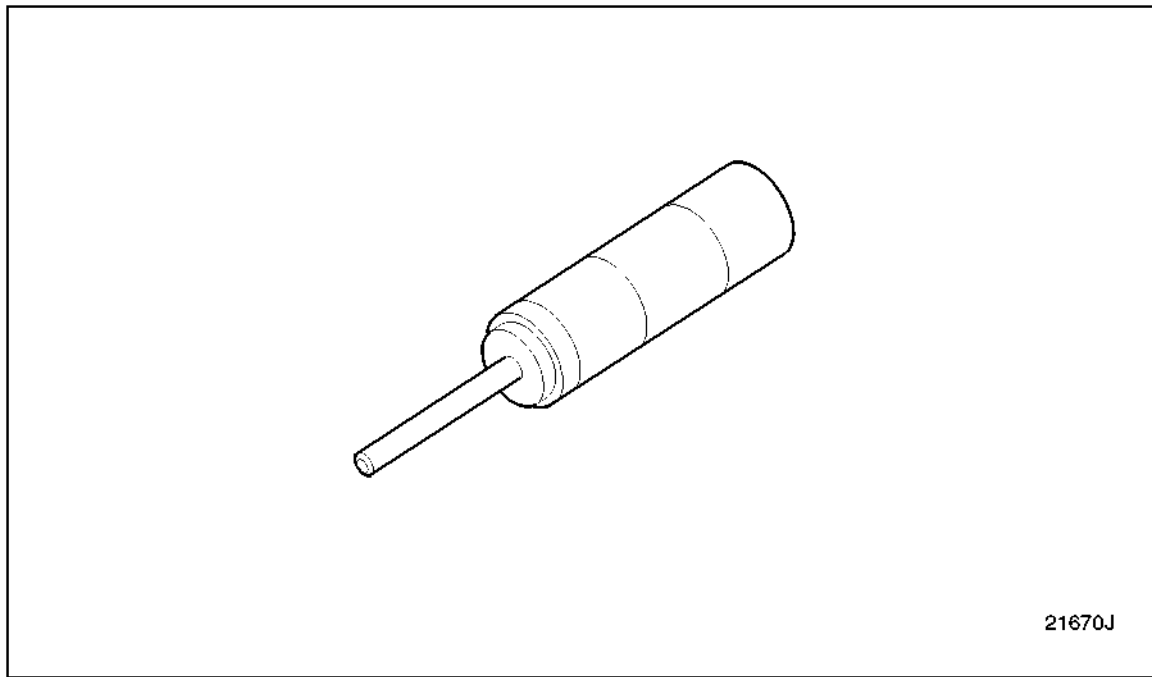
Valve Seat Insert Installer, Intake,J 33190
